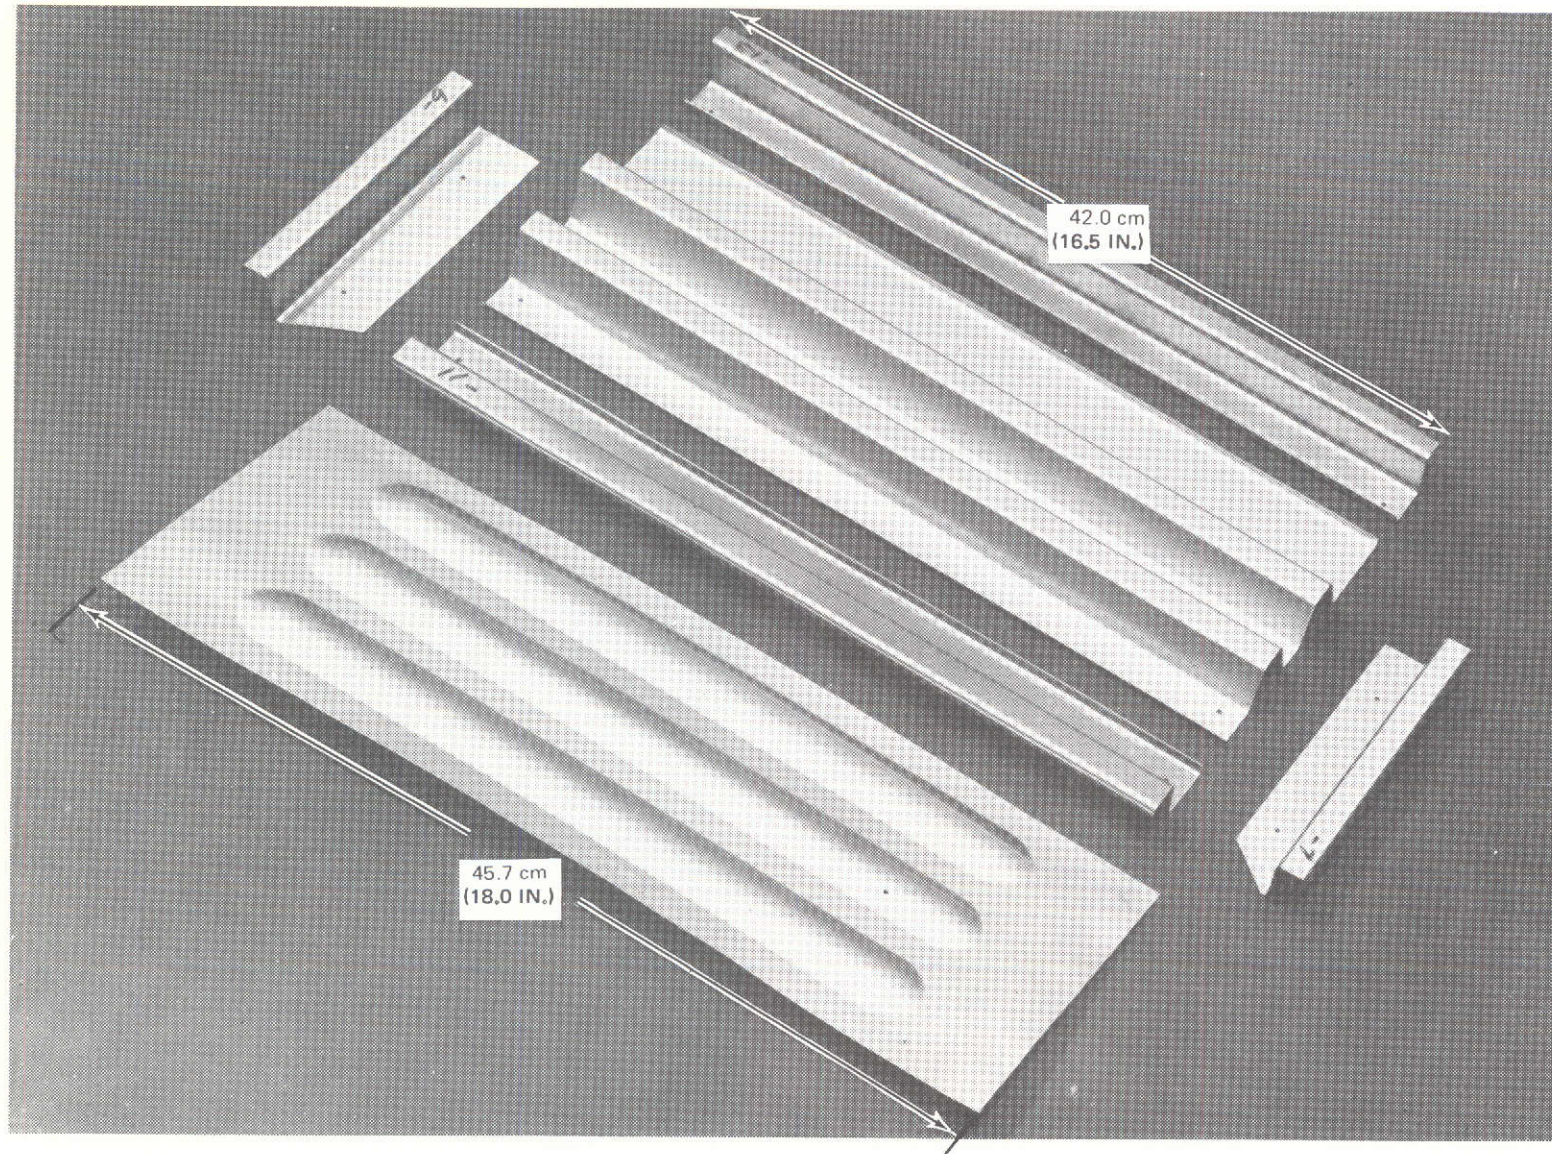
Detail Parts for Corrugation-Stiffened Test Panel
